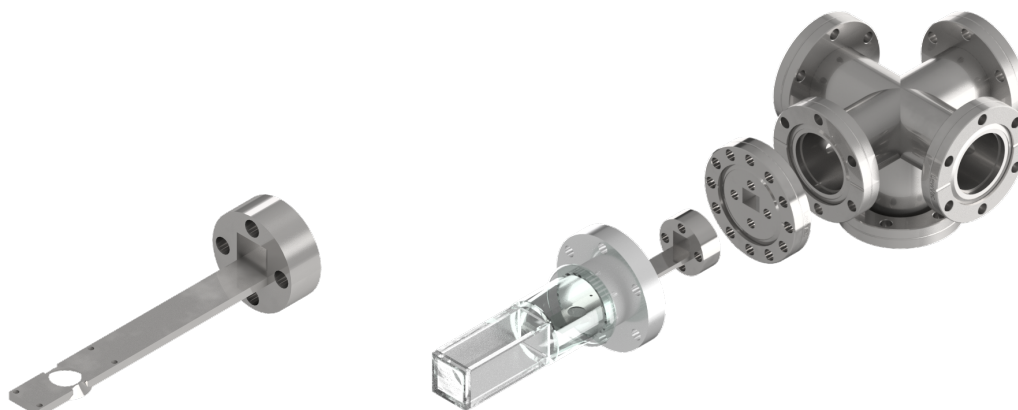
Holding assembly for cavity mount. Left: Cavity mounting finger for vacuum chamber. Right: Exploded assembly showing how the finger attaches to the rest of the chamber. Starting from the left, we have the cell, cavity finger, customised double-sided flange, and five-way cross (which is connected to the rest of the vacuum chamber). Both the vacuum cell and the five-way cross can have rotatable flanges, allowing the finger and cell to rotate independently of each other.
